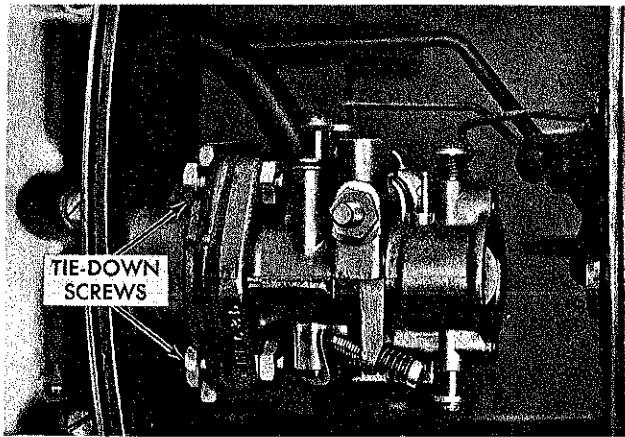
It is important that the proper tie-down screws be used on the carburetor and airbox flanges. Screws too long will bottom on the carburetor body and permit air leaks.
